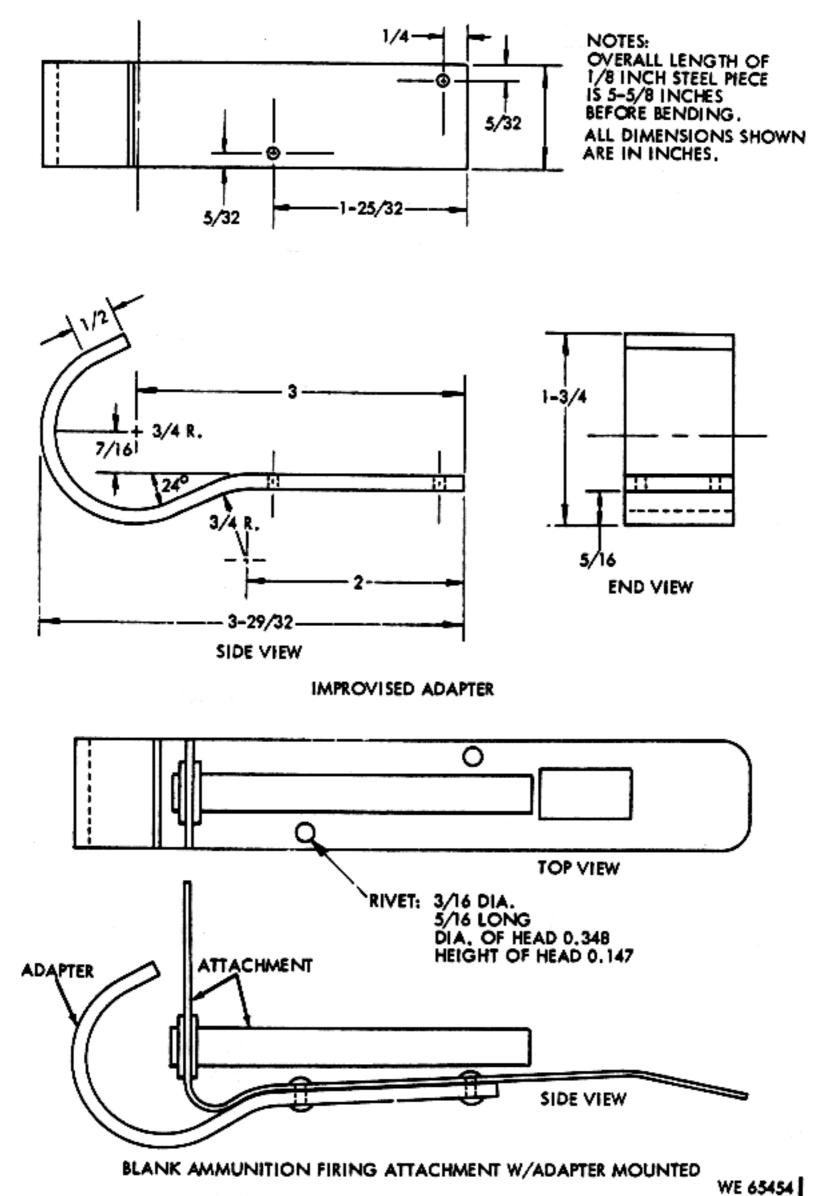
Improvised adapter for blank ammunition firing attachment.
